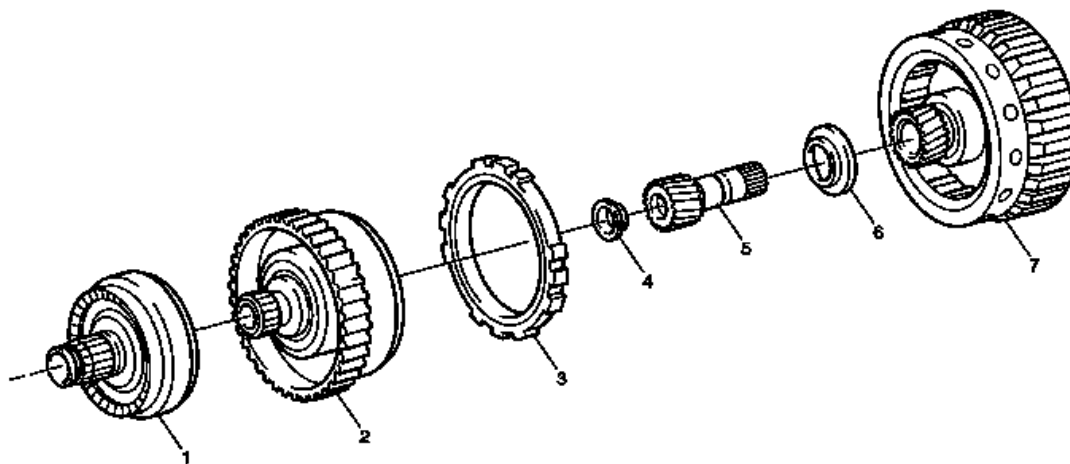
Exploded View Of Planetary Gear And One-Way Clutch
